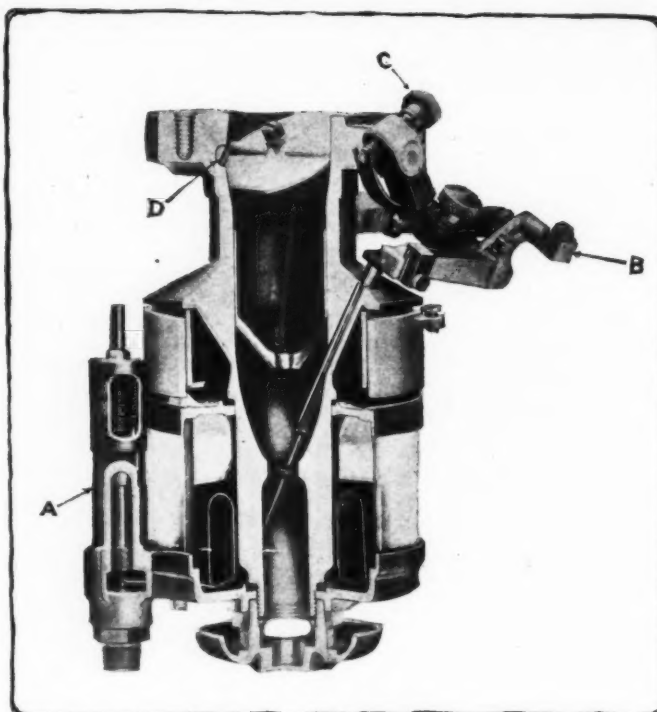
Quarter section through the New-Miller carbureter showing construction
